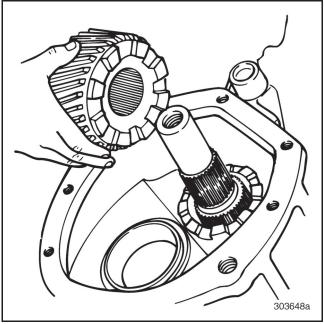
Installing Helical Gear onto Front-Drive Shaft
